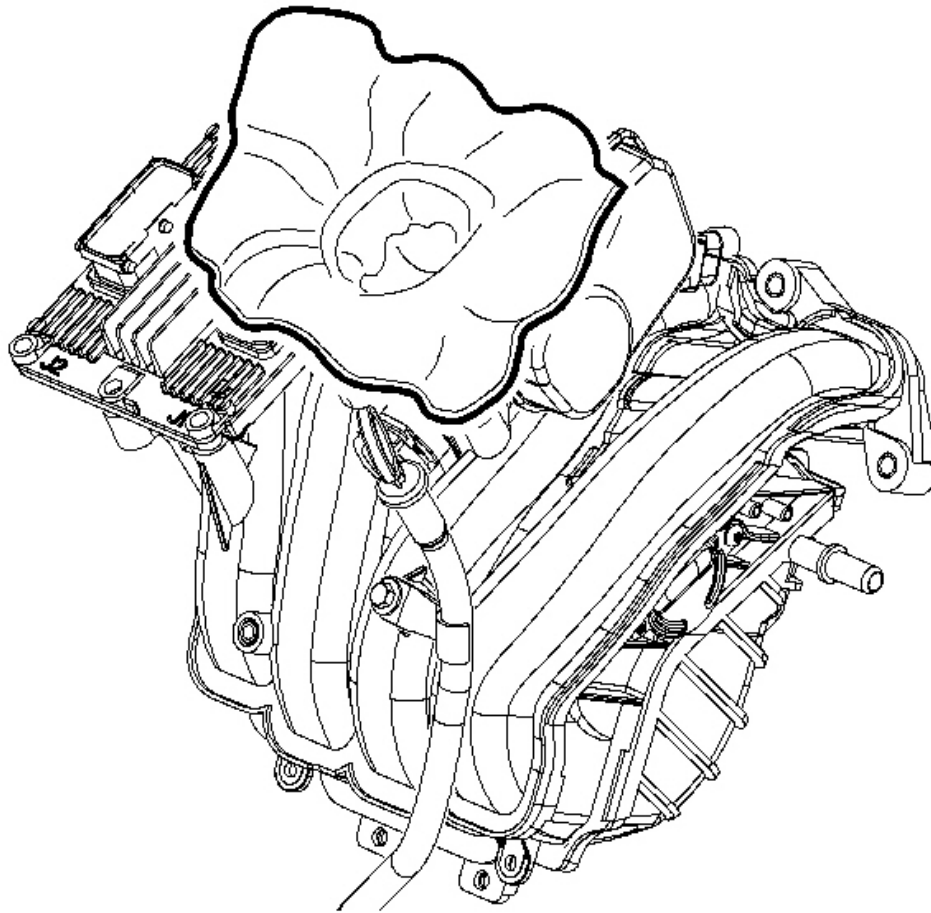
Covering Throttle Body Opening With A Shop Towel
